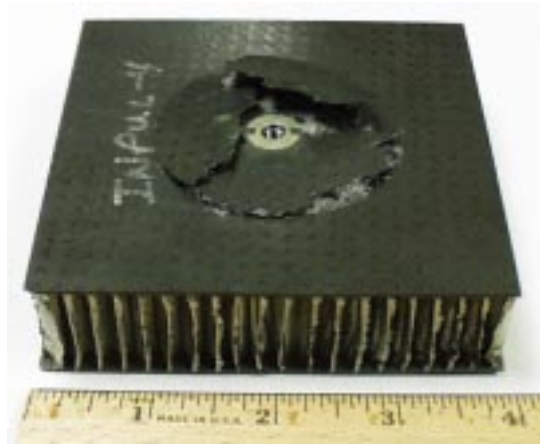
Post-test photo of insert pull out test specimen InPul-4.
